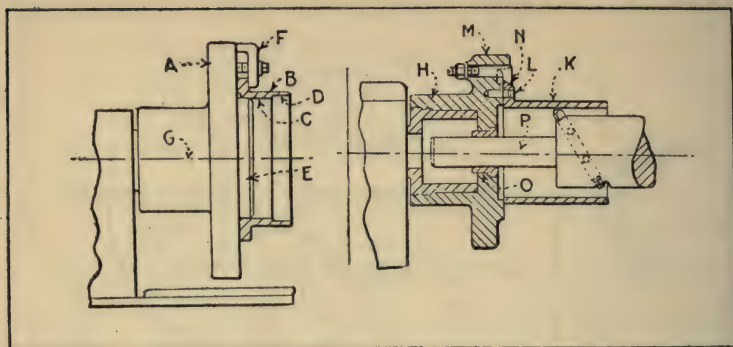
TWO SIMPLE FACE-PLATE FIXTURES
